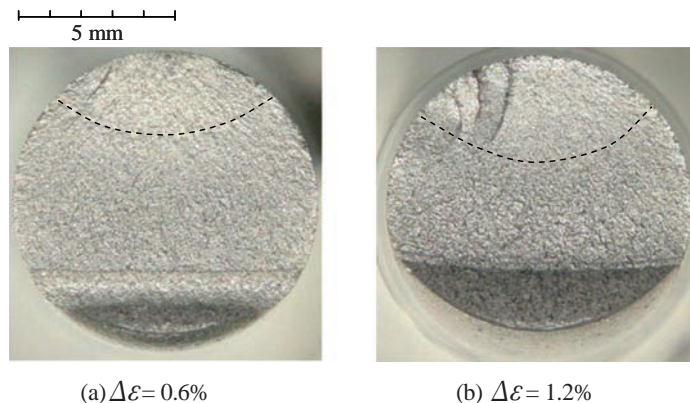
Optical microscopic view of fractured surface of fatigue specimens.
